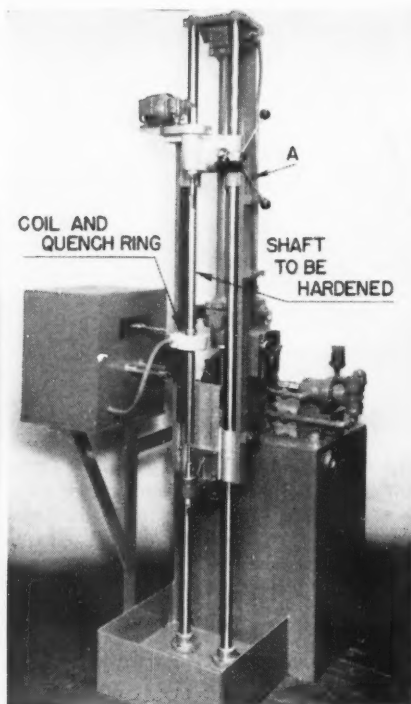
A progressive feed unit used for hardening steel shafts up to approximately three feet in length.
